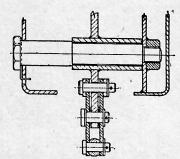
Section through brake pedal fulcrum pin (4AB).
